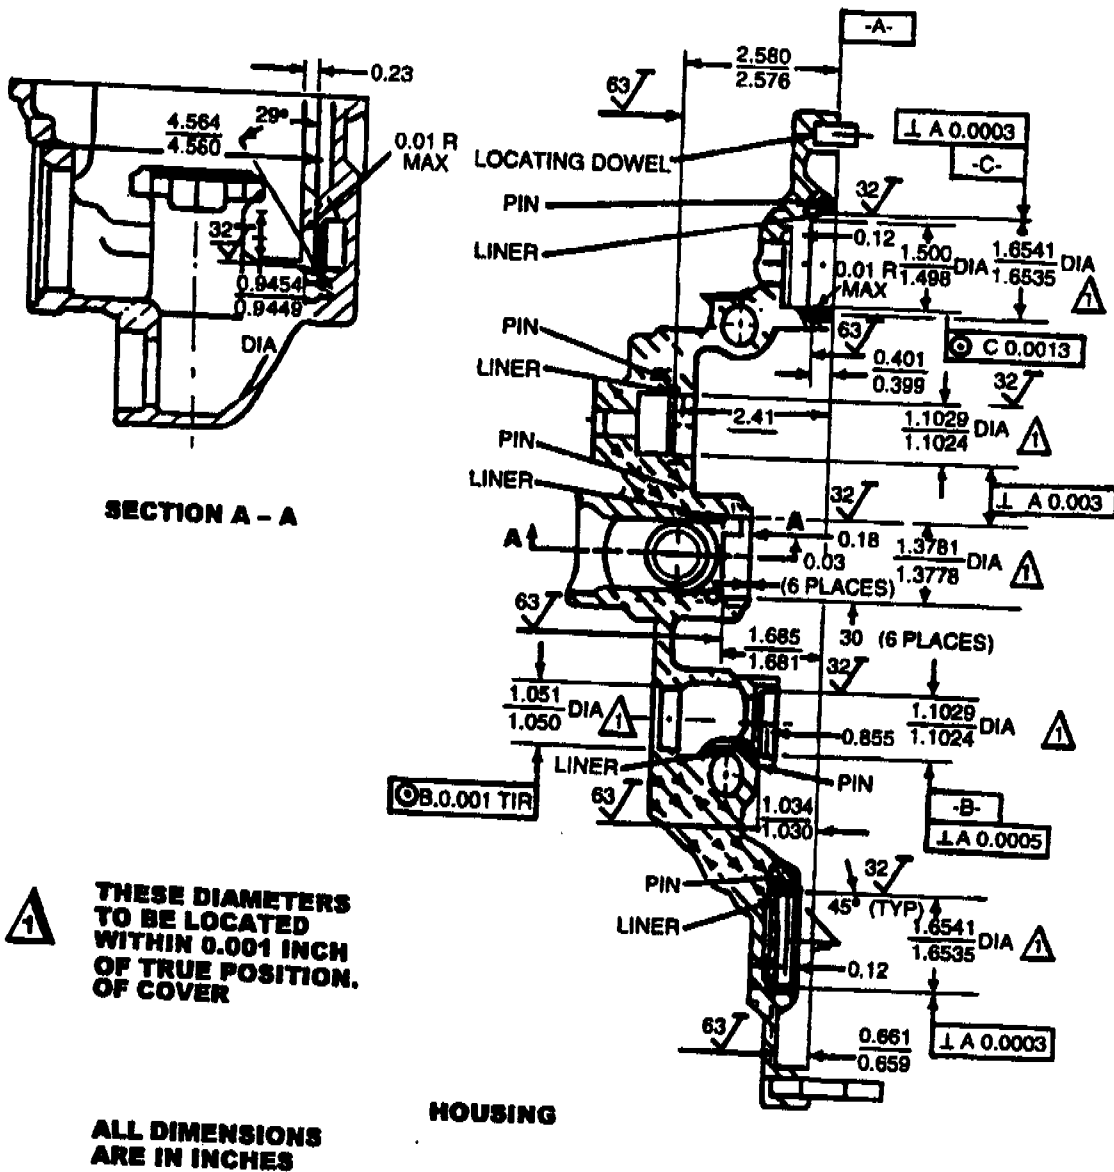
Accessory Drive Gearbox Bearing Liner Repair (English) (Sheet 2 of 2).
